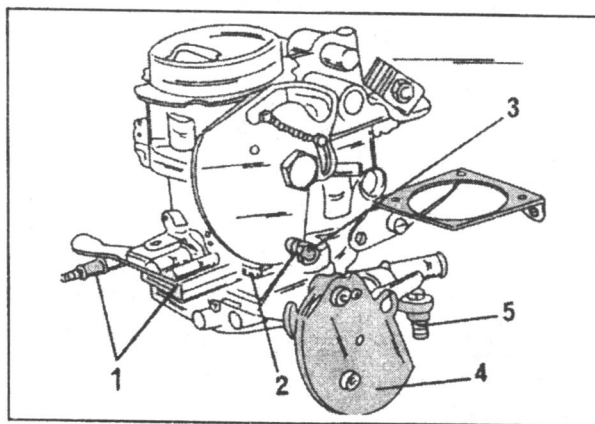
View of the carburettor from the side with the throttle operating lever.
